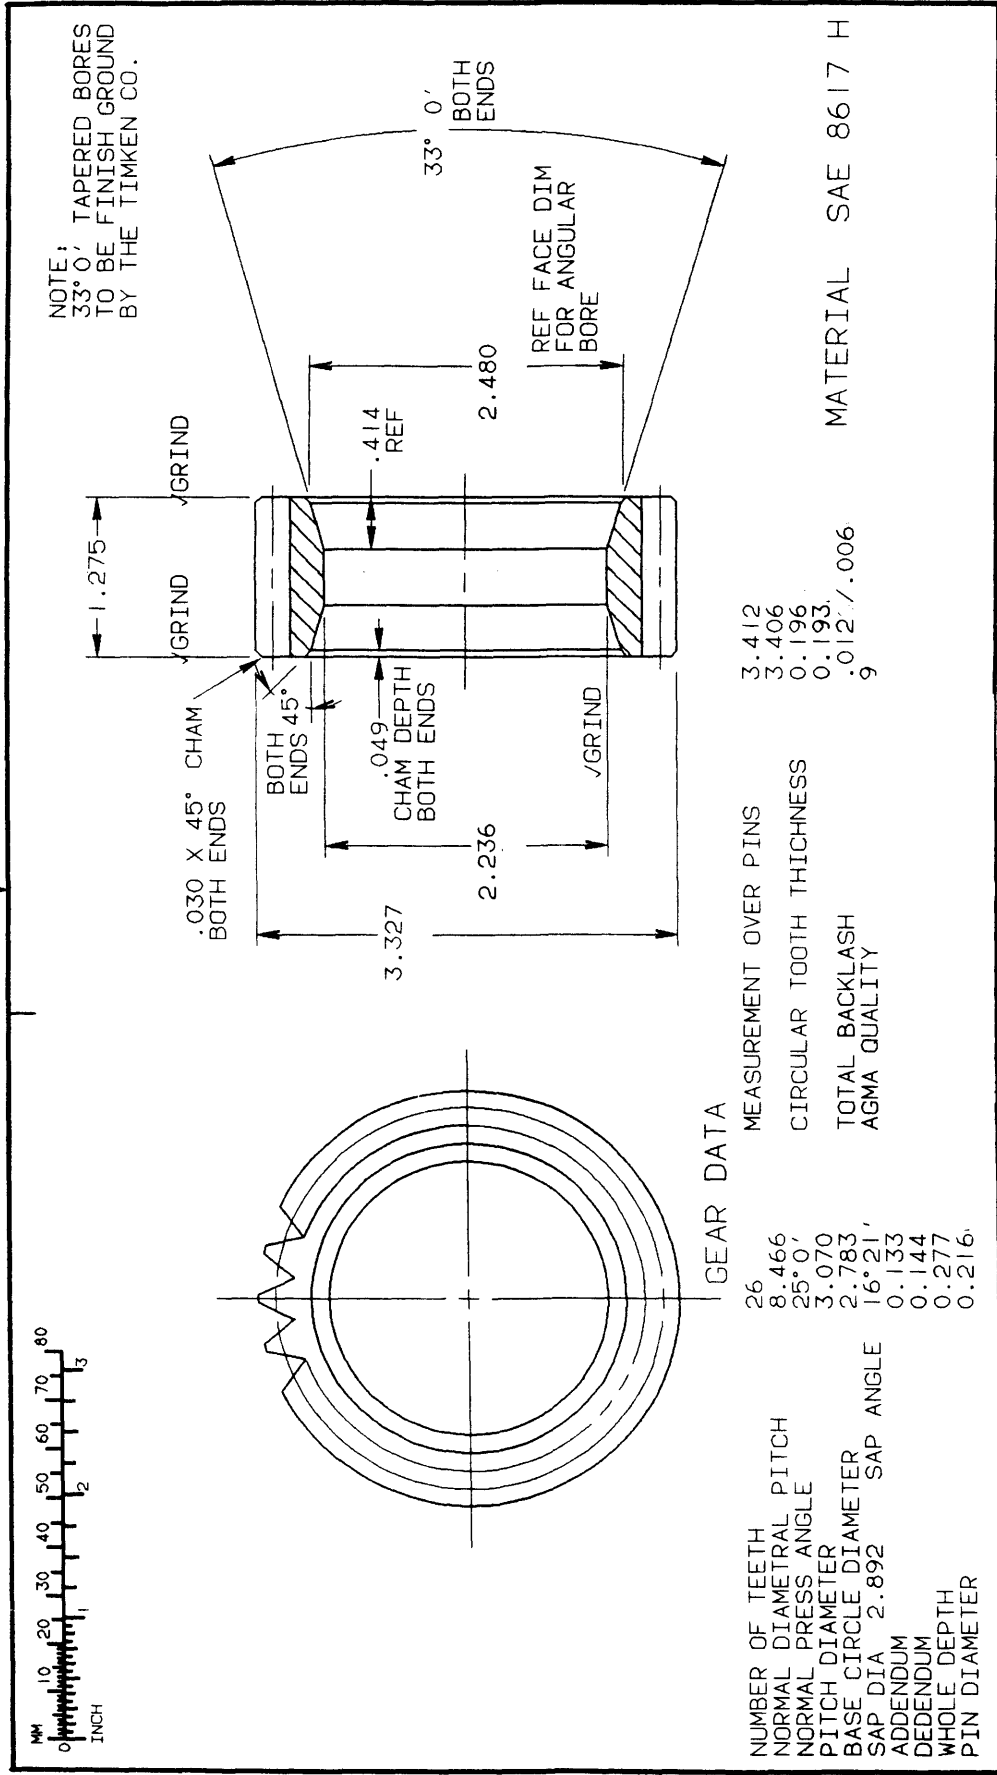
Illustration of the tapered-bore design for the prototypes used the FEA and testing.
